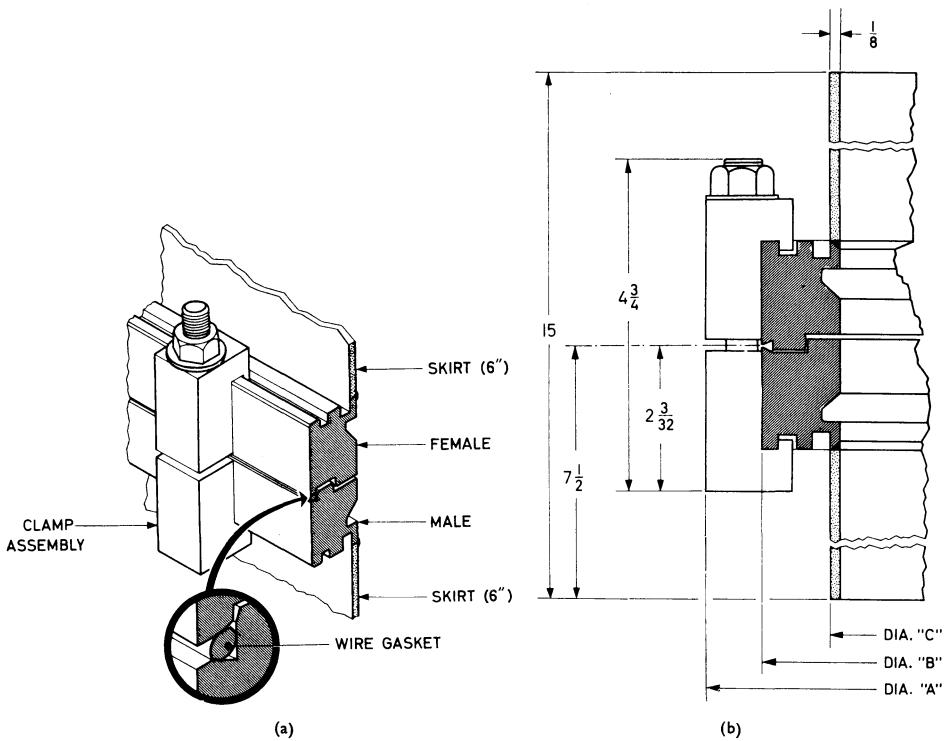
A Wheeler seal and flange dimensions (*Courtesy of Varian^{1257a}*)
